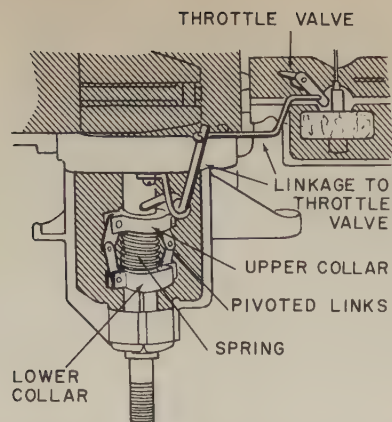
Sectional view of lower part of the engine, showing details of the governor and the linkage to the throttle valve. (Lawn Boy Division of Outboard Marine Corporation)
